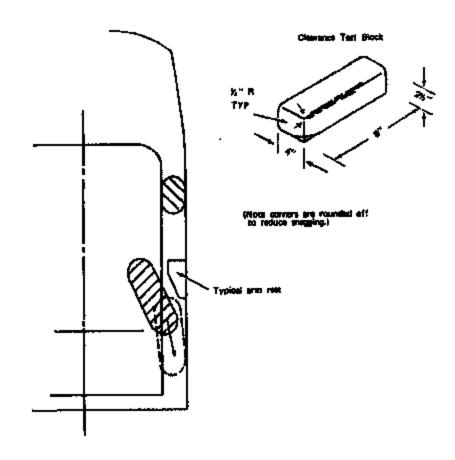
USE OF CLEARANCE TEST BLOCK TO DETERMINE HAND/ARM ACCESS
